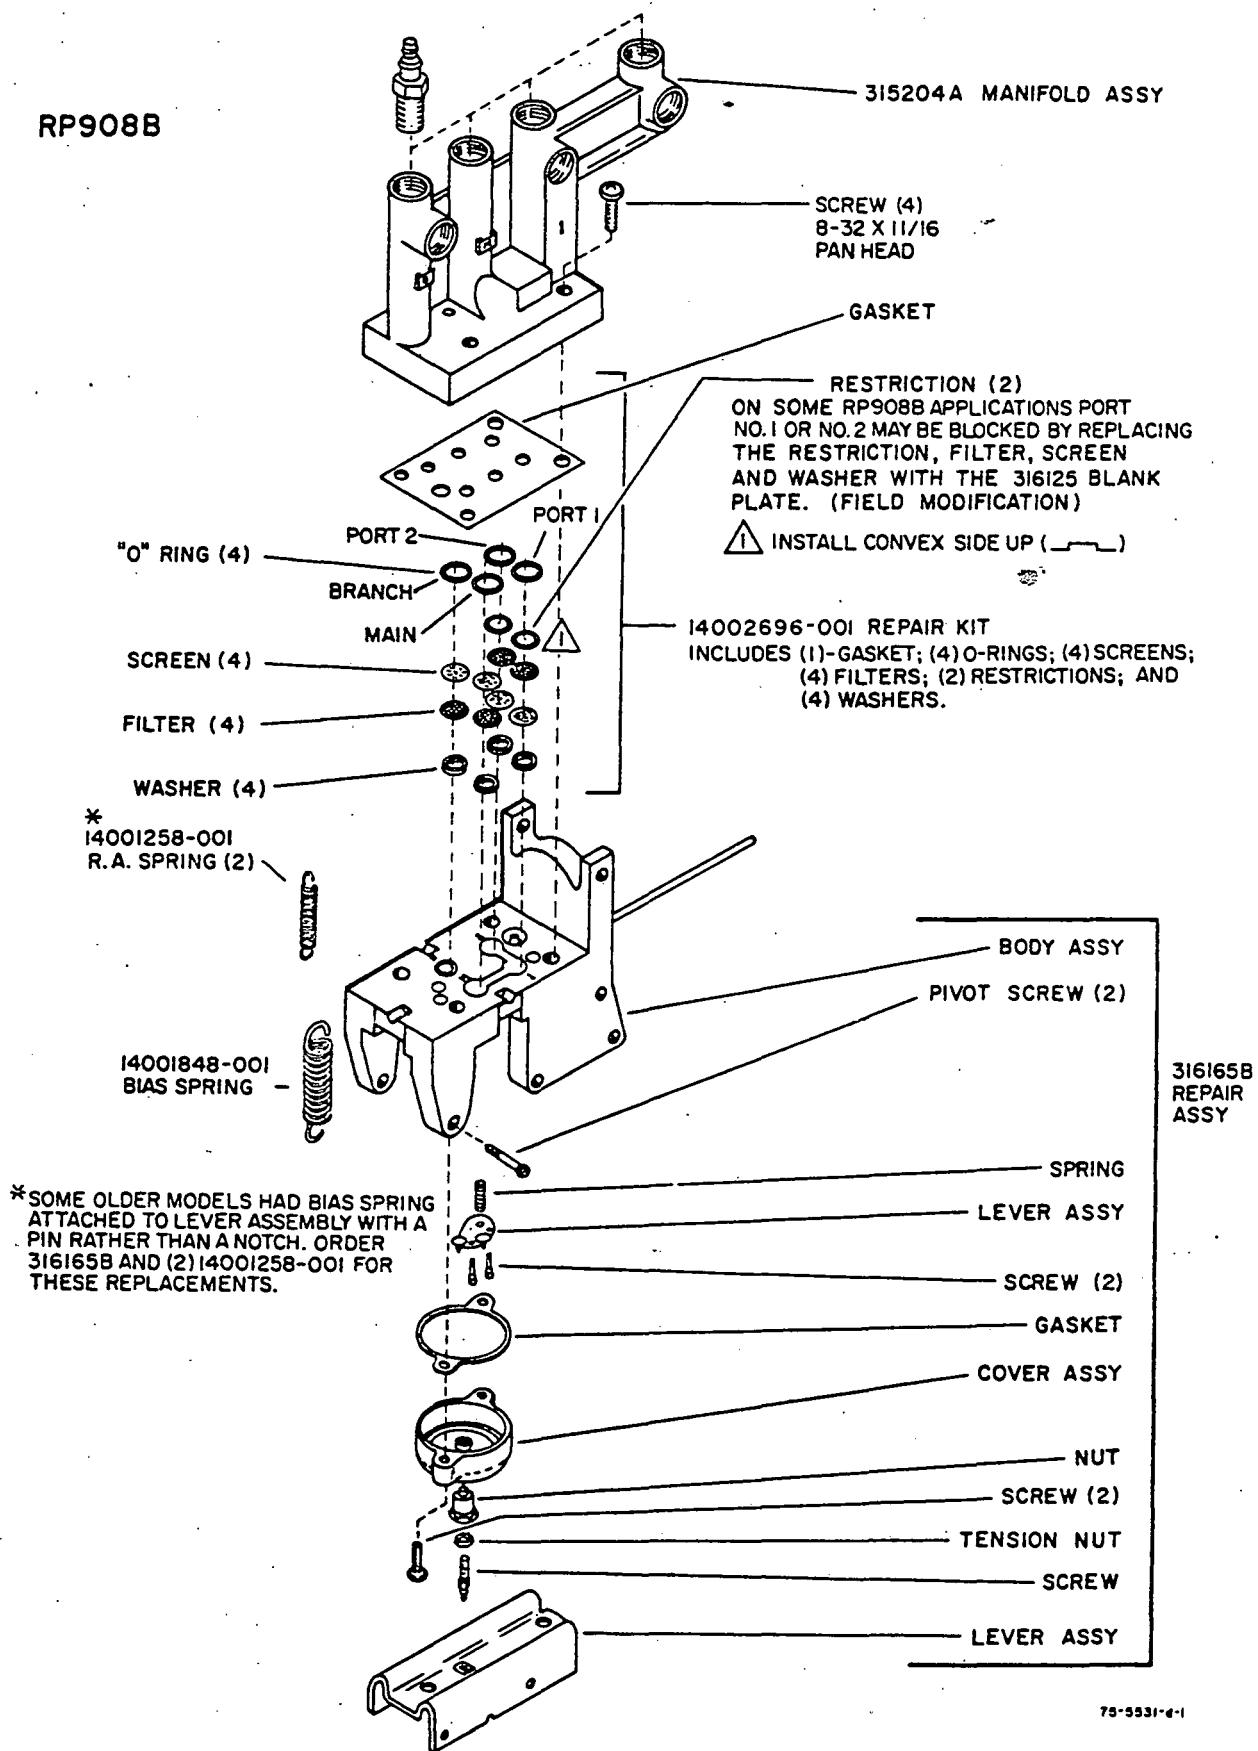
Detail of RP908B Manifold and Body Assembly.
